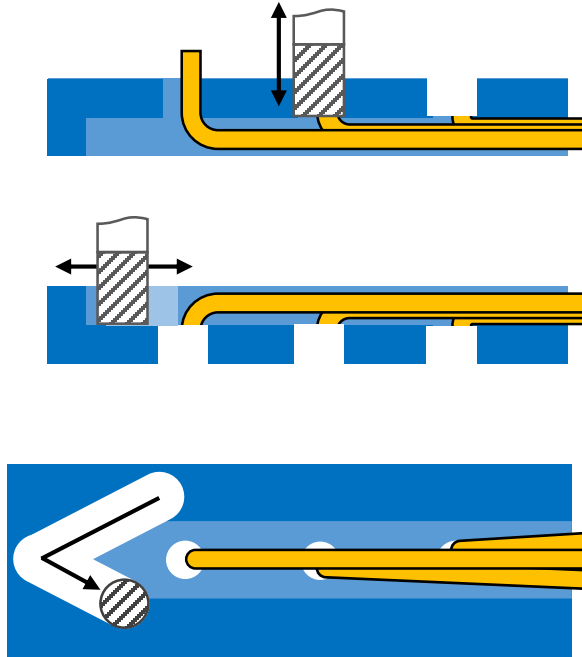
Diagram of Wire Trimming and Tip Forming. A square end mill is centered over each wire and removes excess wire, epoxy, and mold material above the specified level in a plunging operation. The same tool is used to cut a beveled tip in the electrode.
